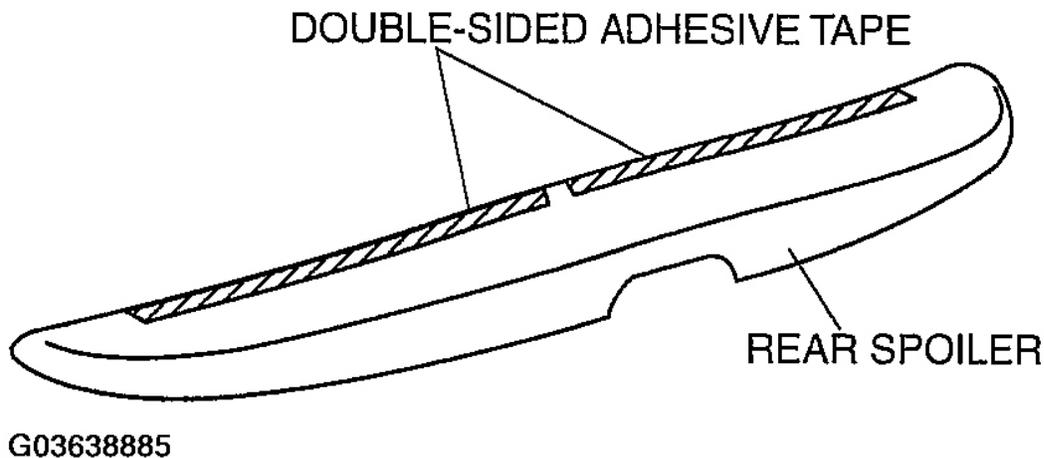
Affixing Double-Sided Adhesive Tape To Rear Spoiler
